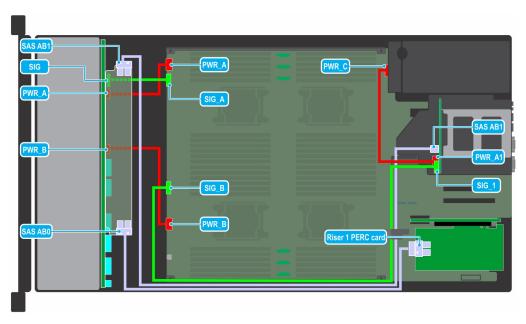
Cable routing - 26 x 2.5 inch, (SAS, 24 front + 2 rear) drive backplane with single PERC card
